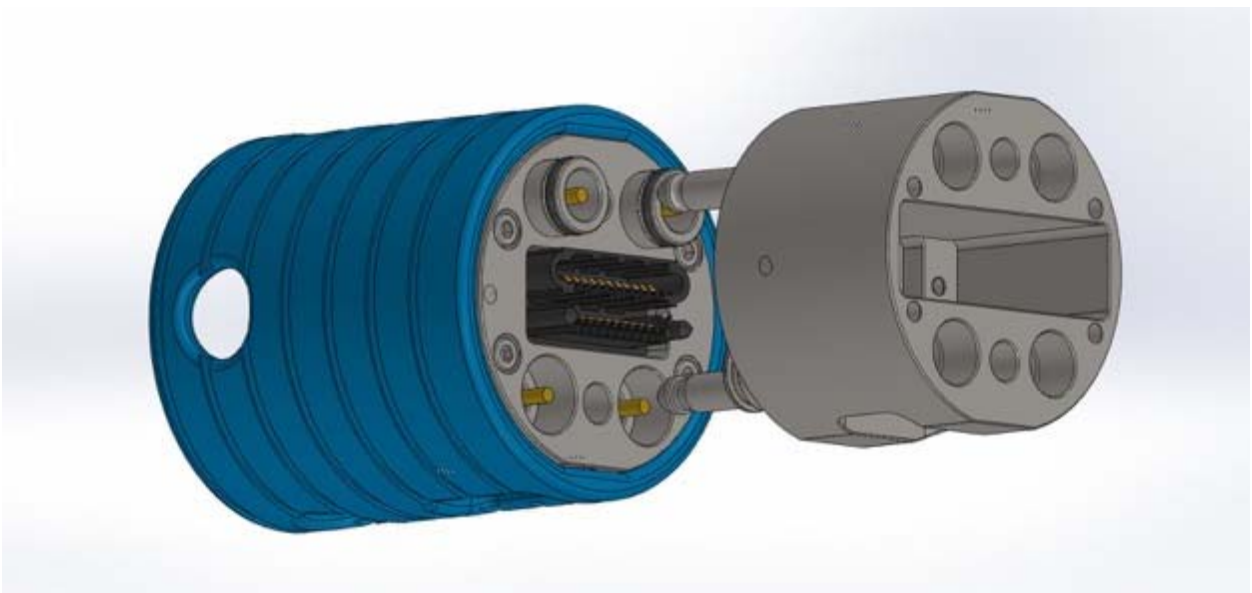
Example ‘sleeve’ for integrating Universal Connector into an arm module.
